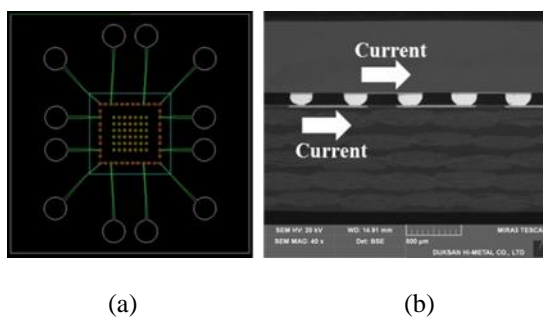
(a) Package design and (b) SEM image of the electromigration test configuration
